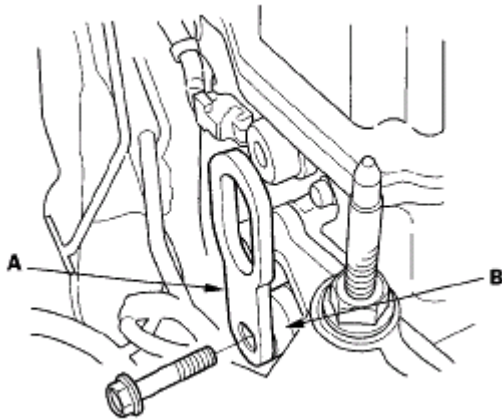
Identifying Side Engine Mount Bracket With Spacer
